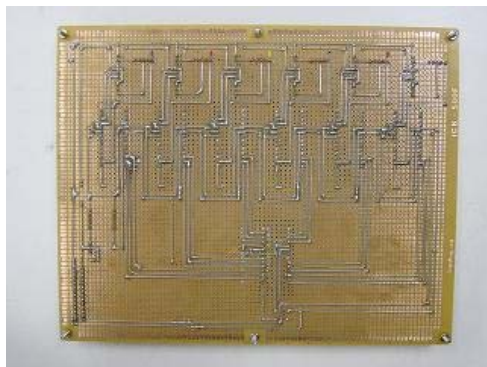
shows the fabricated control circuit of the six-axis biped robot. It is very easy to fabricate and check the circuit because all parts are arranged two dimensionally. Figure 8 shows the fabricated mechanism of the six-axis biped robot.
